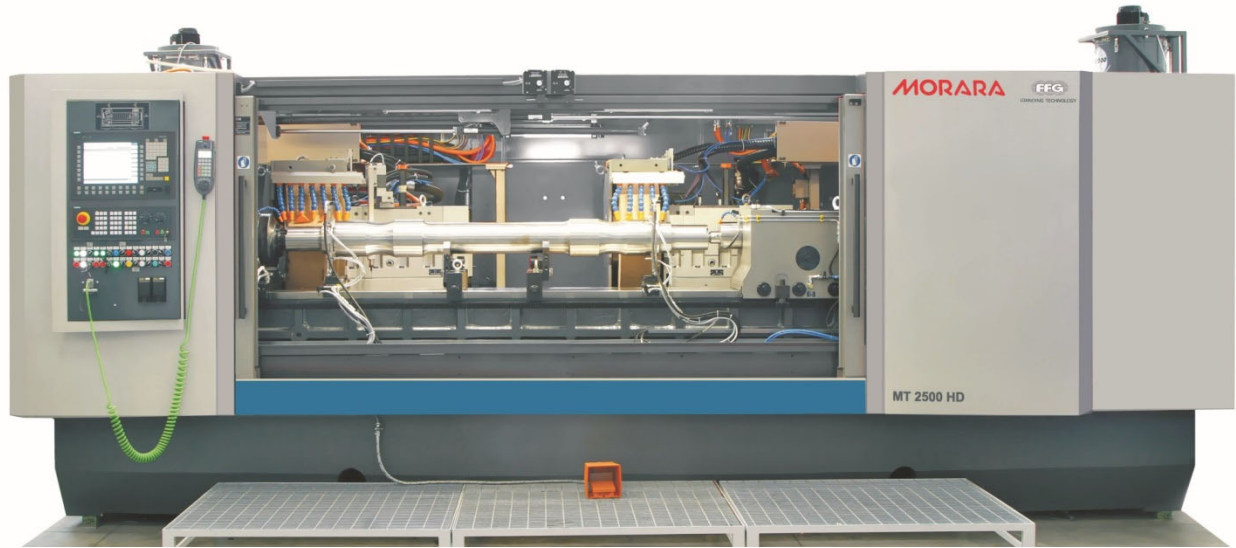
MORARA MT 2500 HD CNC grinding machine with two hydrodynamically mounted grinding units for complete machining of wheel axles in one clamping
